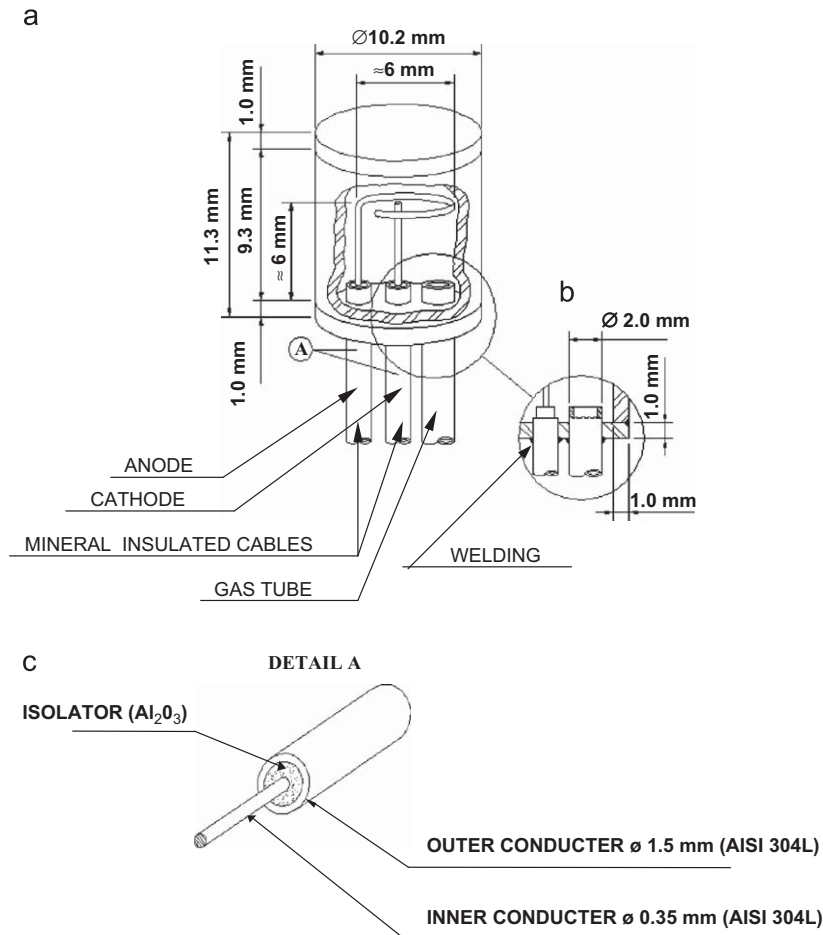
Schematic drawing of the developed chamber (a). Expanded view of the cables and gas tube welding (b). Mineral insulated cable detail (c).
